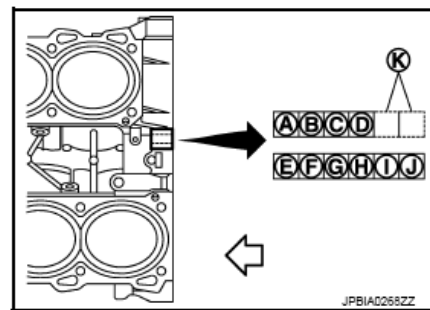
Identifying Bearing Housing Grades And Cylinder Bore Grades
